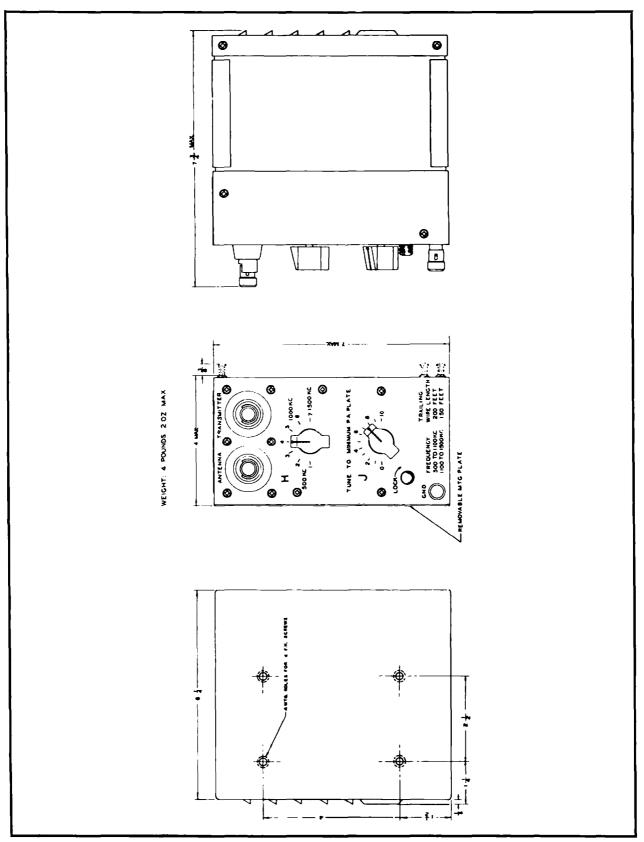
Antenna Loading Coil CU-26/ART-13 with Mounting Plate MT-162/ART-13 (Navy Type -47282)—Outline Dimensions
